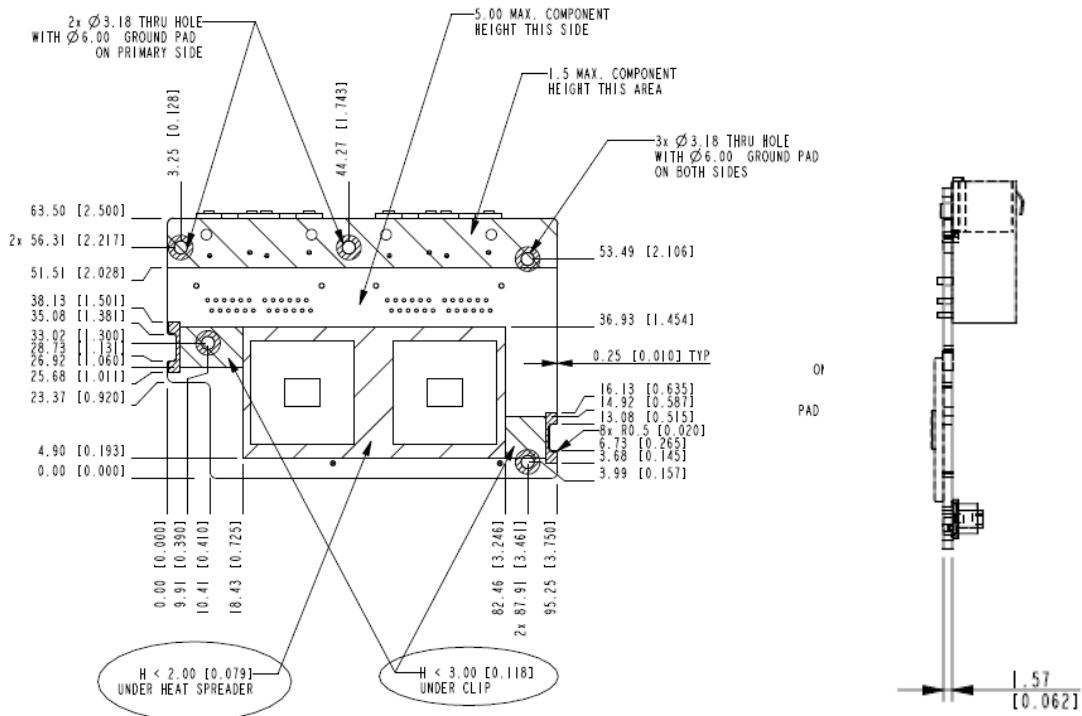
Quad-Port GbE I/O Module Mechanical Drawing
